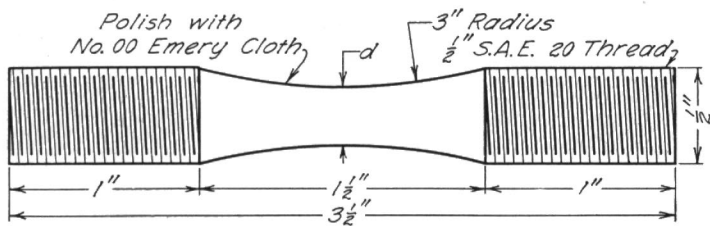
SPECIMEN FOR AXIAL-STRESS (TENSION-COMPRESSION) FATIGUE TESTING MACHINE
